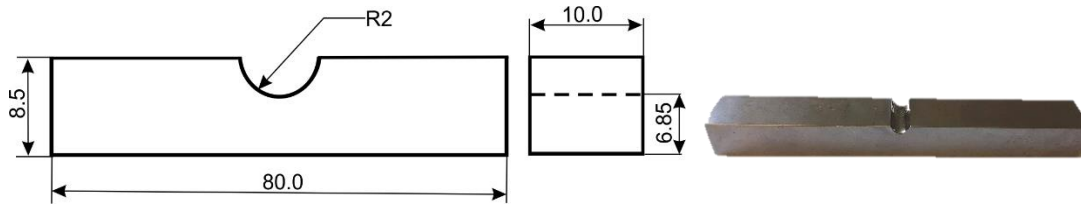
12 Fatigue specimen: Geometrical shape and Real shape.
